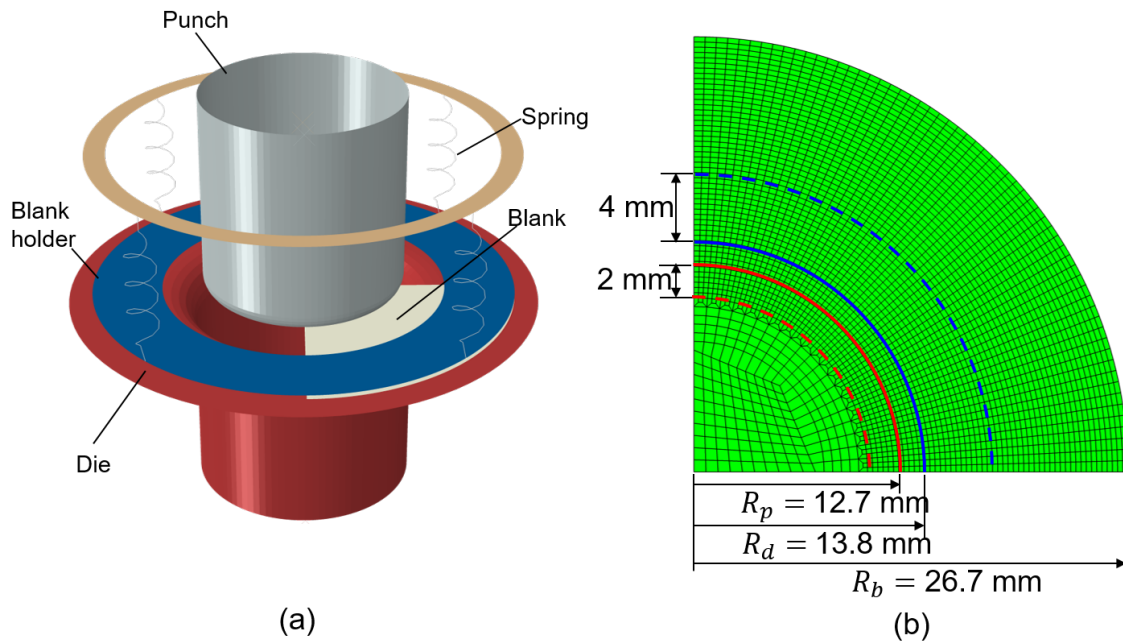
(a) Schematic of the deep-drawing tooling used in the simulations. (b) FE mesh of a quarter blank with some key dimensions of the tooling.
